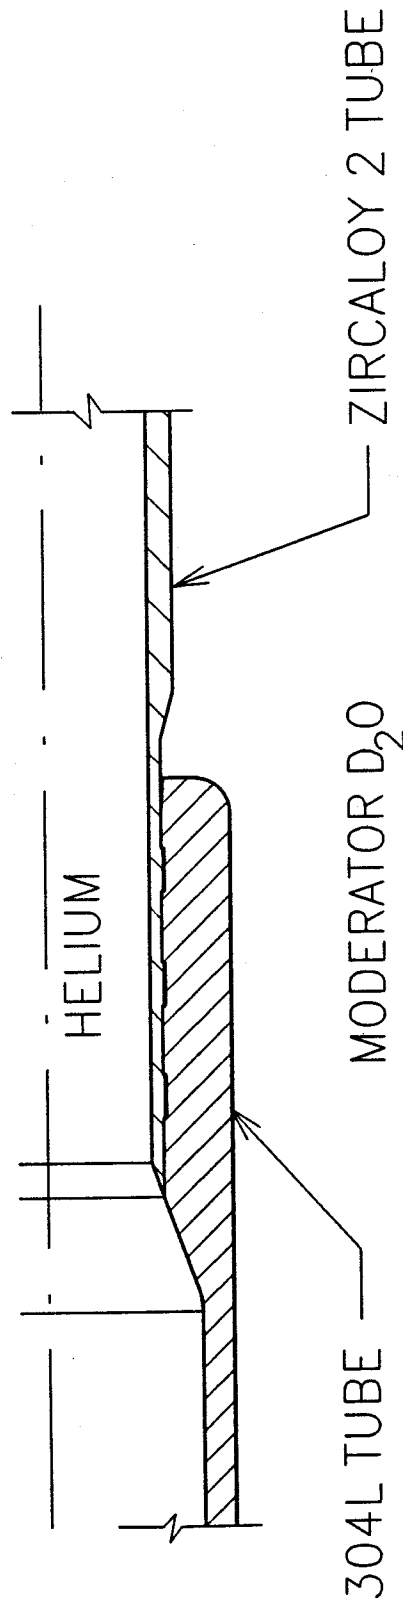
Flux Detector Guide Tube Roll-Expanded Joint
